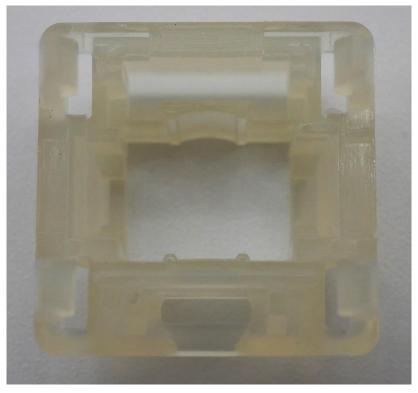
Gateron Root Beer Float top housing internal design showing mold markings in upper left- and right- hand corners.
